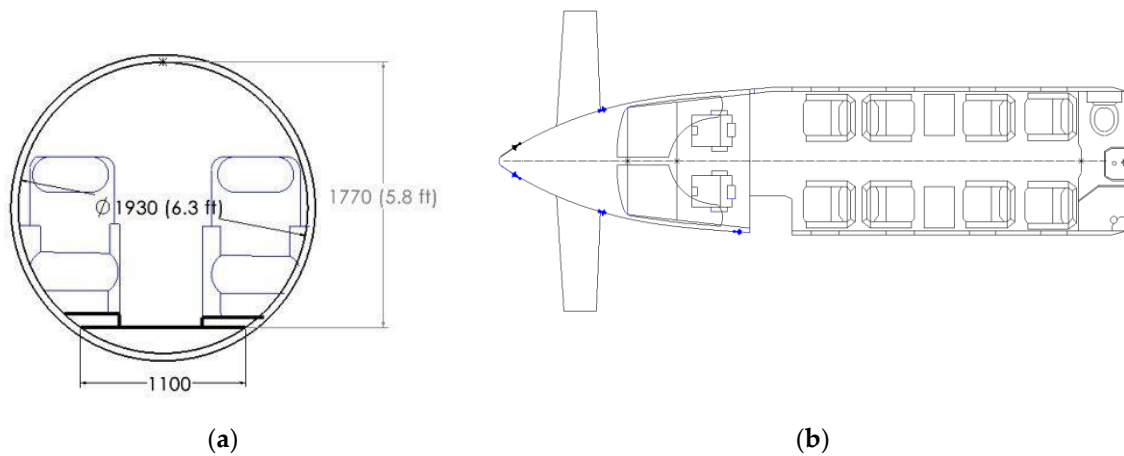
(a) Fuselage Cross-section (b) Fuselage Cabin View
